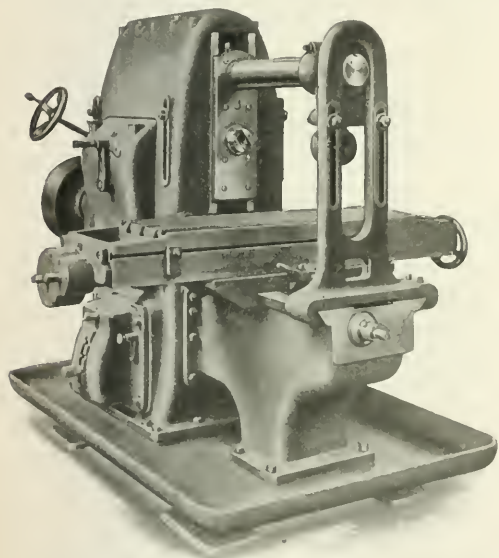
No. 6 Manufacturing Milling Machine built by National Transit Pump & Machine Co.
